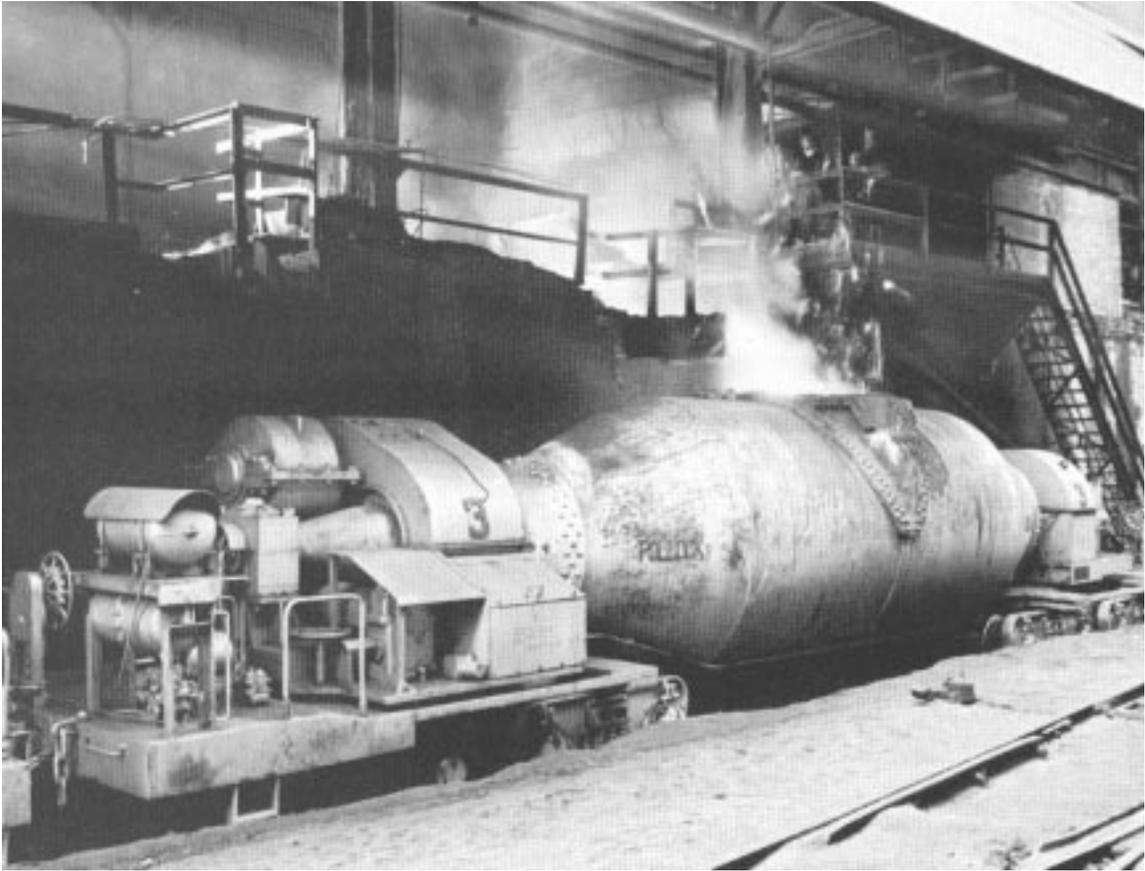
View of hot metal filling a submarine or torpedo ladle.
